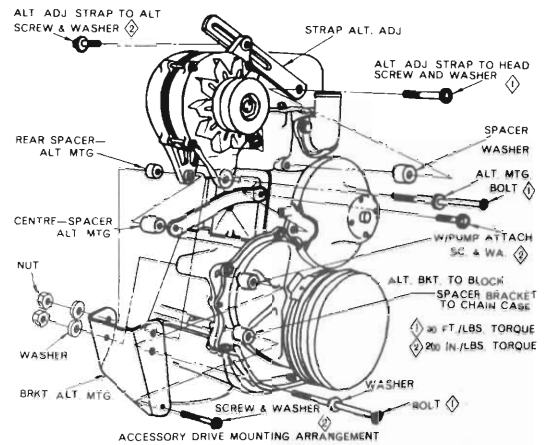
Alternator Mounting Arrangement (6 cyl. Hemi)
